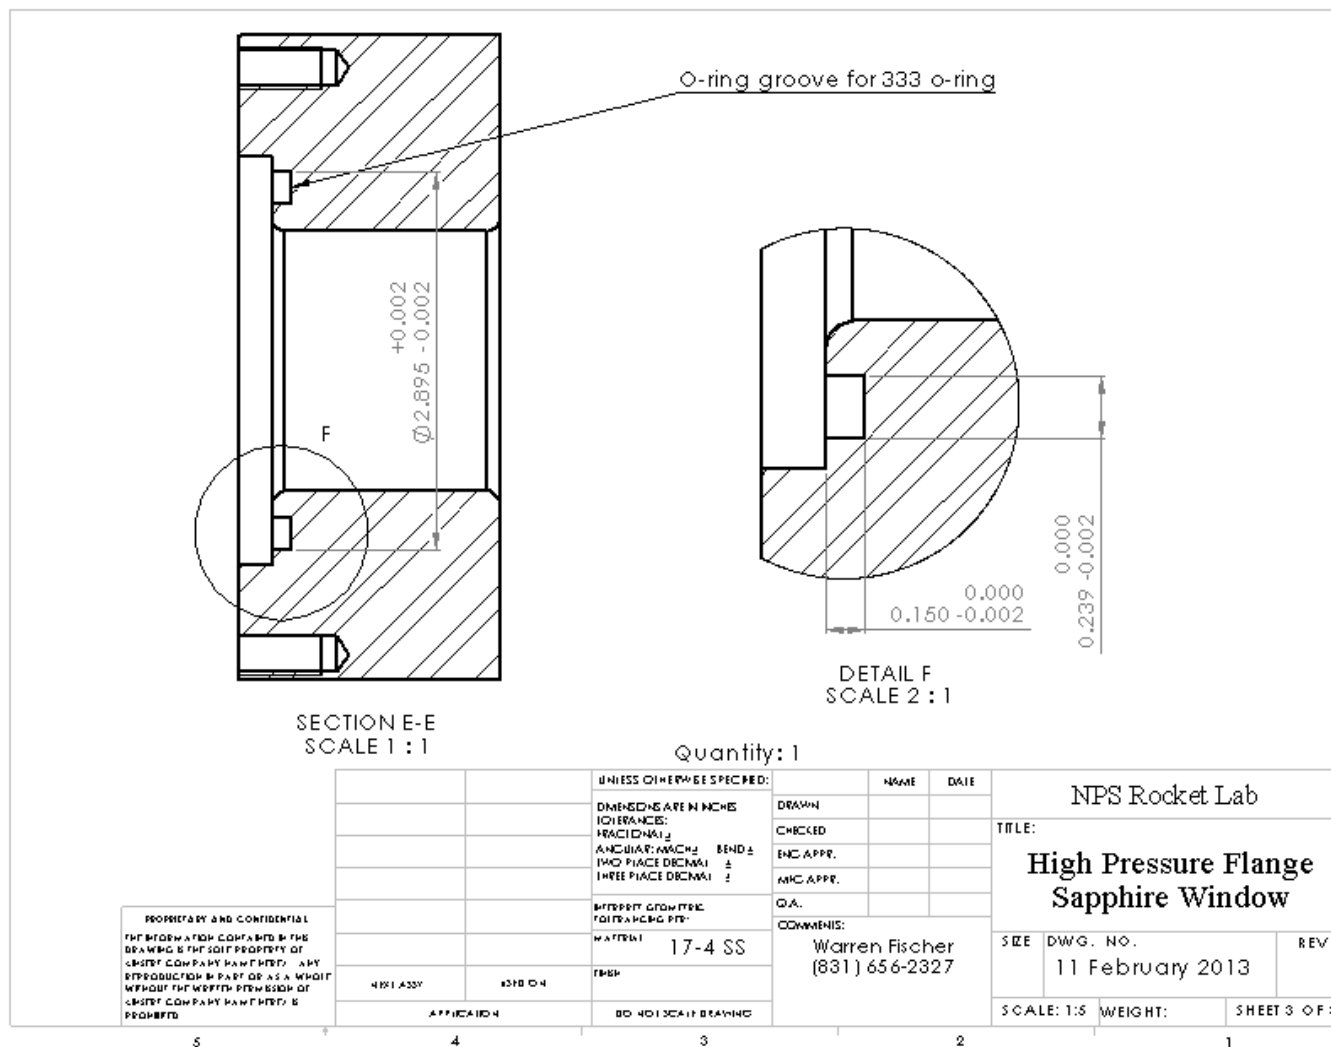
Optical Window Flange Fabrication Drawing (View 3 of 3)
